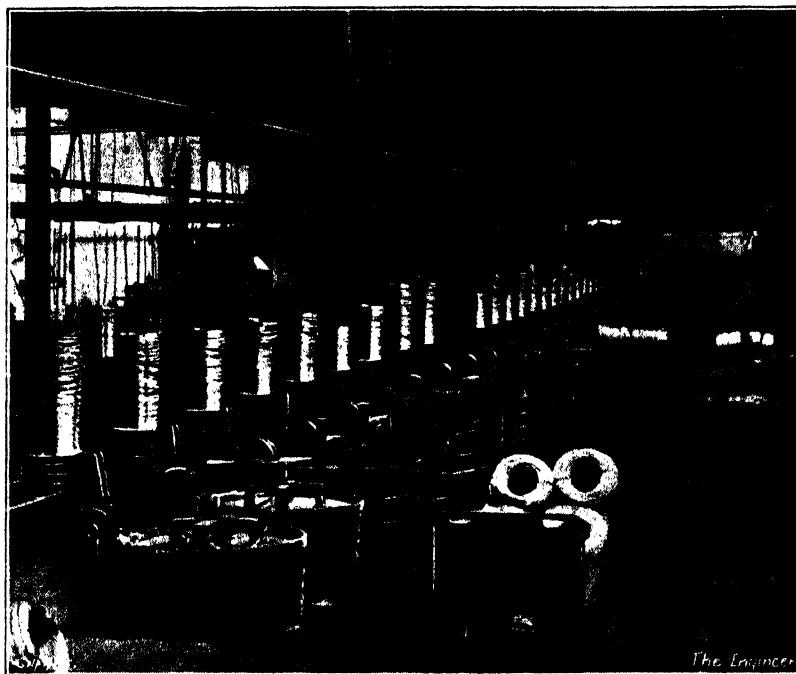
WET MILL FOR CONTINUOUS DRAWING OF FINE WIRE.
